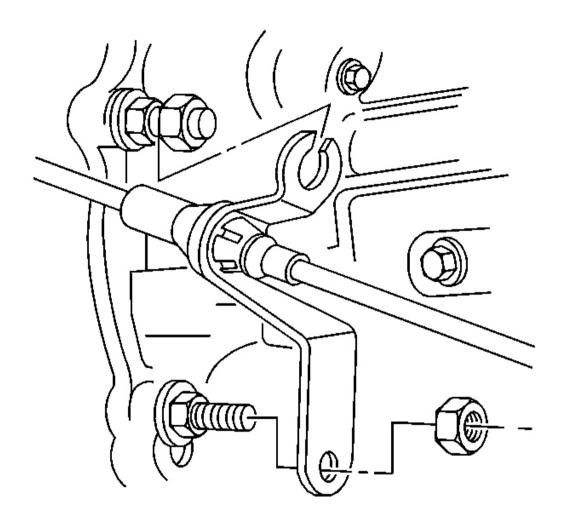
Shift Control Cable Bracket & Nuts Courtesy of GENERAL MOTORS CORP.
